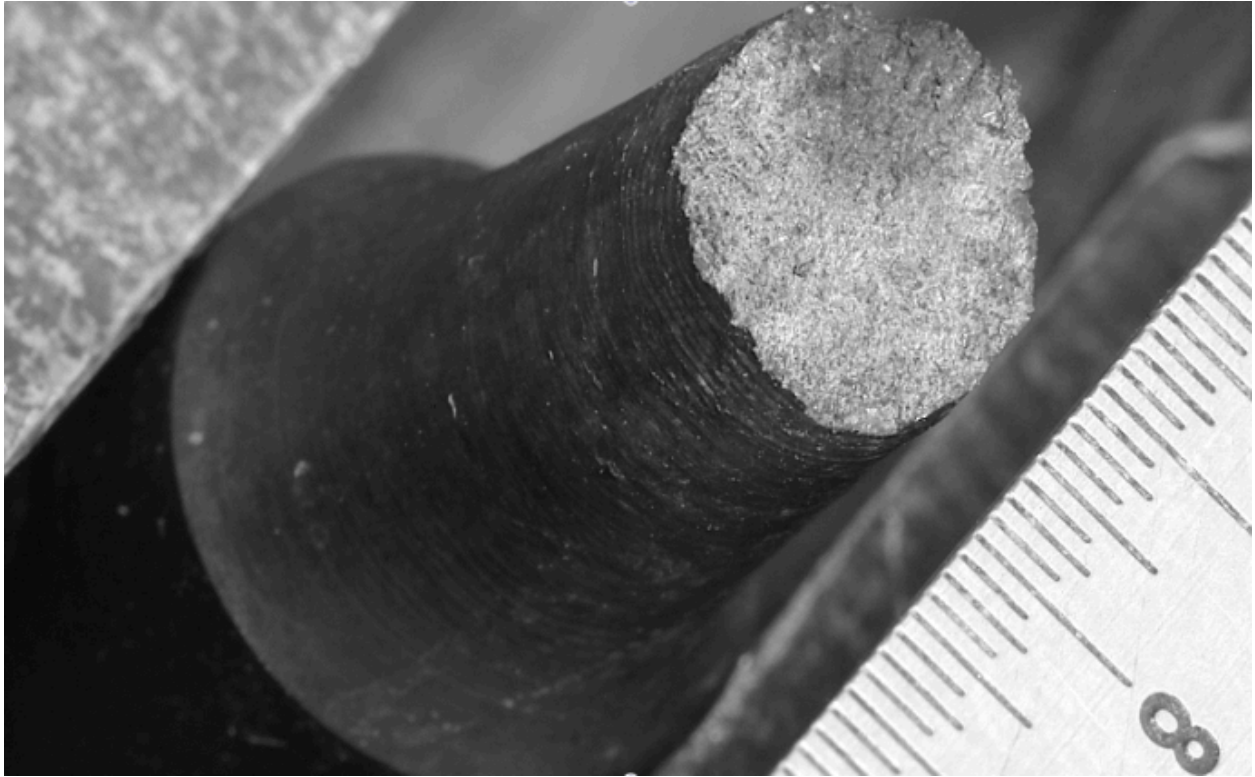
Macro-photographic image of the fracture surface of the specimen S5 (set 128) halve demonstrated on the right-hand side in figure 34.
